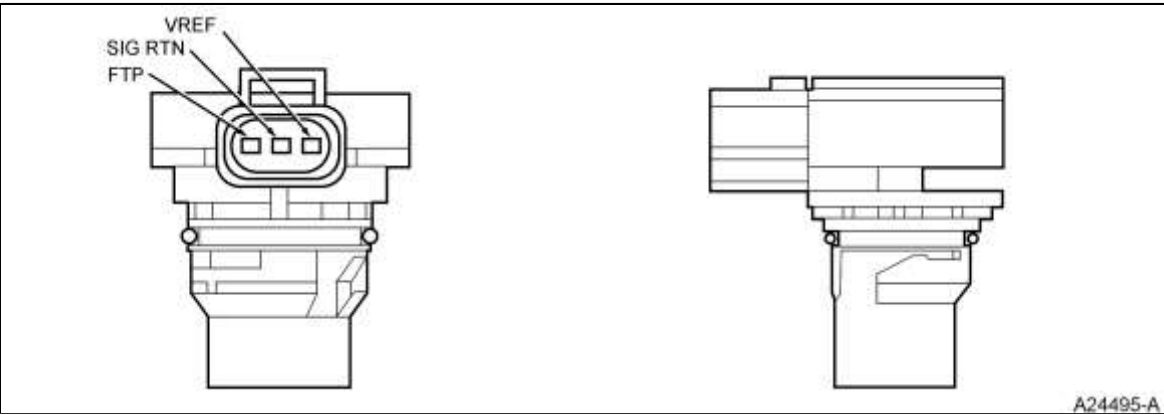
Fuel Tank Pressure (FTP) Sensor
